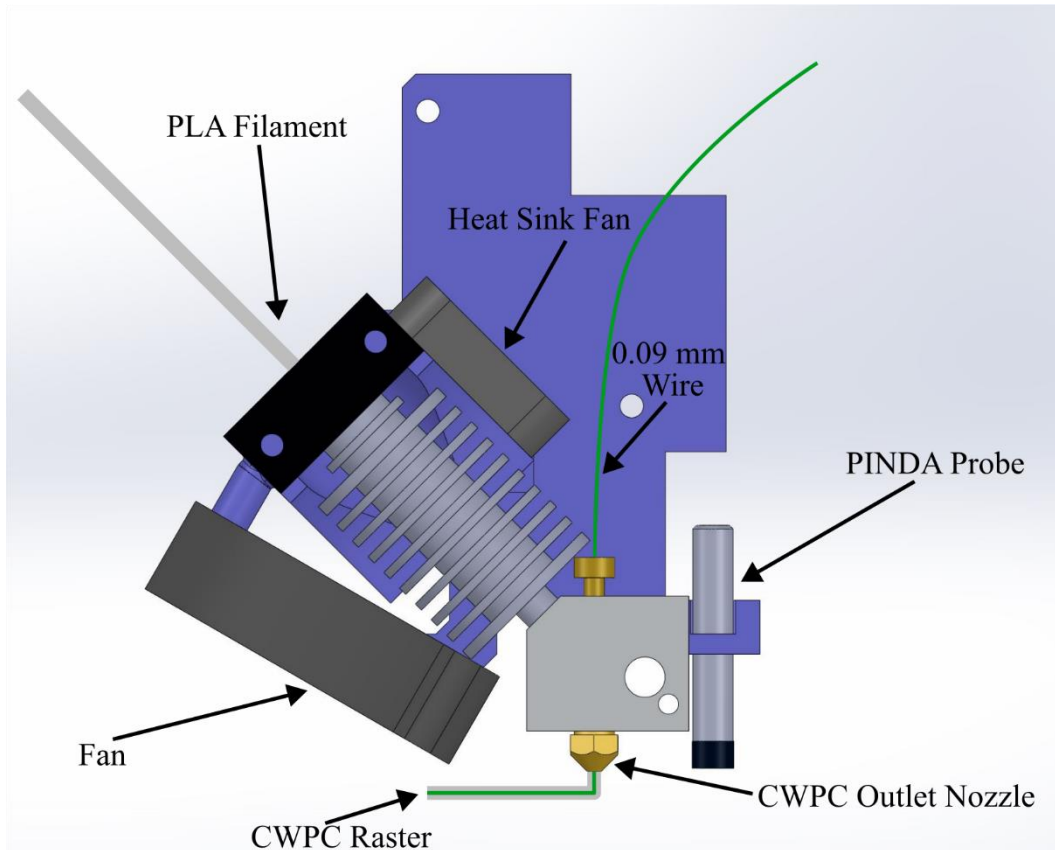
Modified print head showing filament extruded into the heat block on a 45° angle, and continuous wire reinforcement from the top, showing the fan for raster cooling
